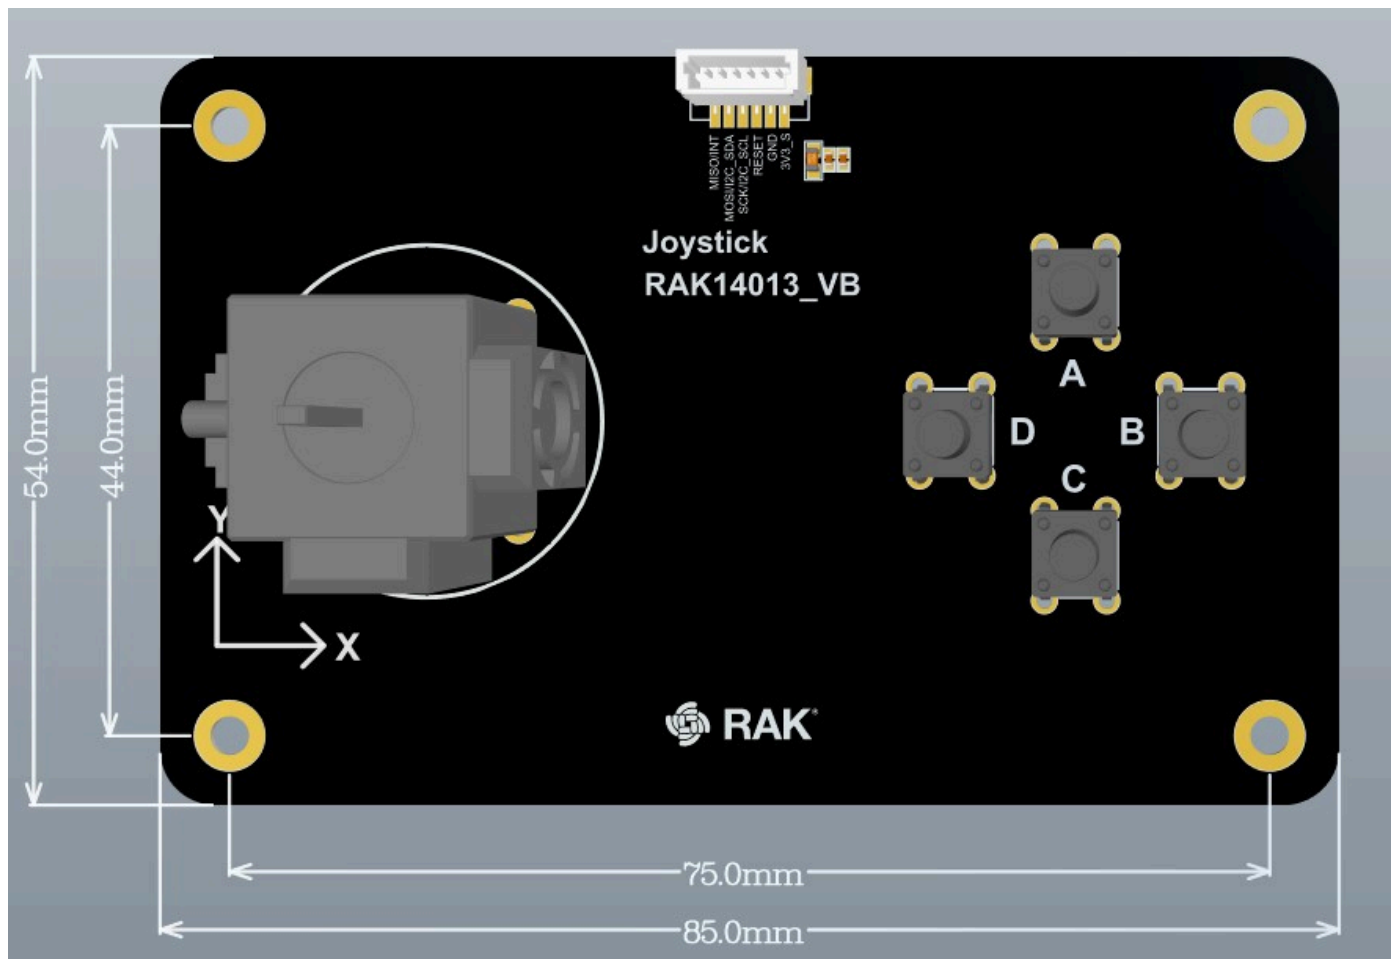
RAK14013 WisBlock Joystick Module Dimensions
